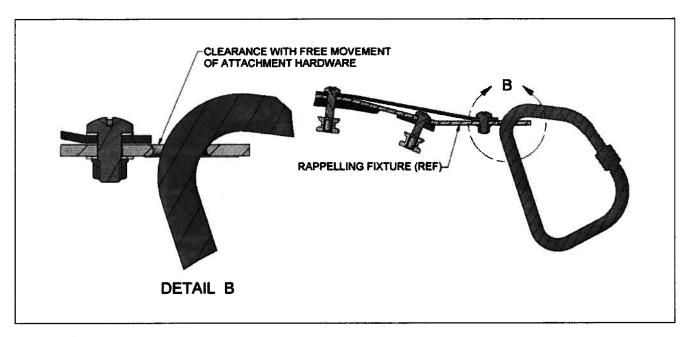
ACCEPTABLE RAPPELLING FIXTURE LOAD ATTACHMENT
